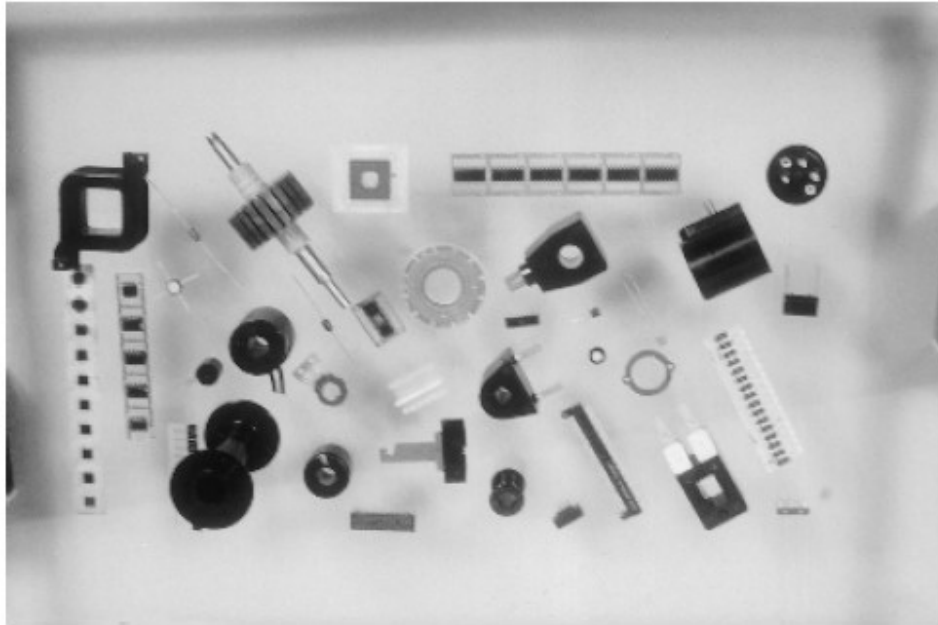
Typical electrical and electronic components encapsulated by transfer molding (insert molding).
